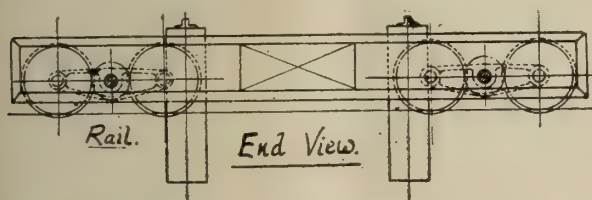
DESIGN AND EQUIPMENT OF CRANES.
